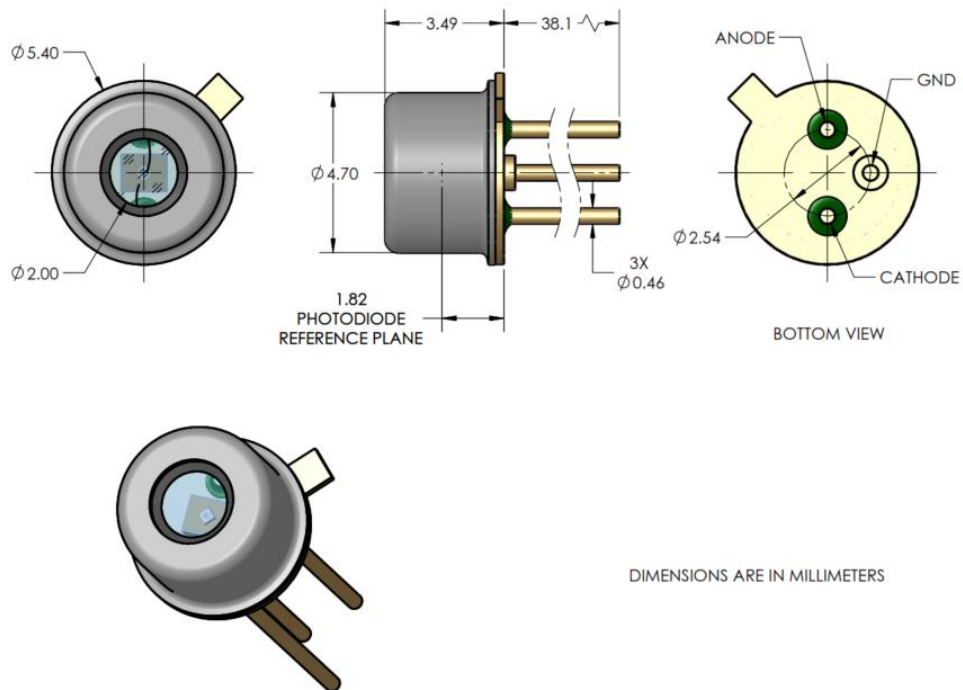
Large Aperture 3-pin TO-46 Dimensions
